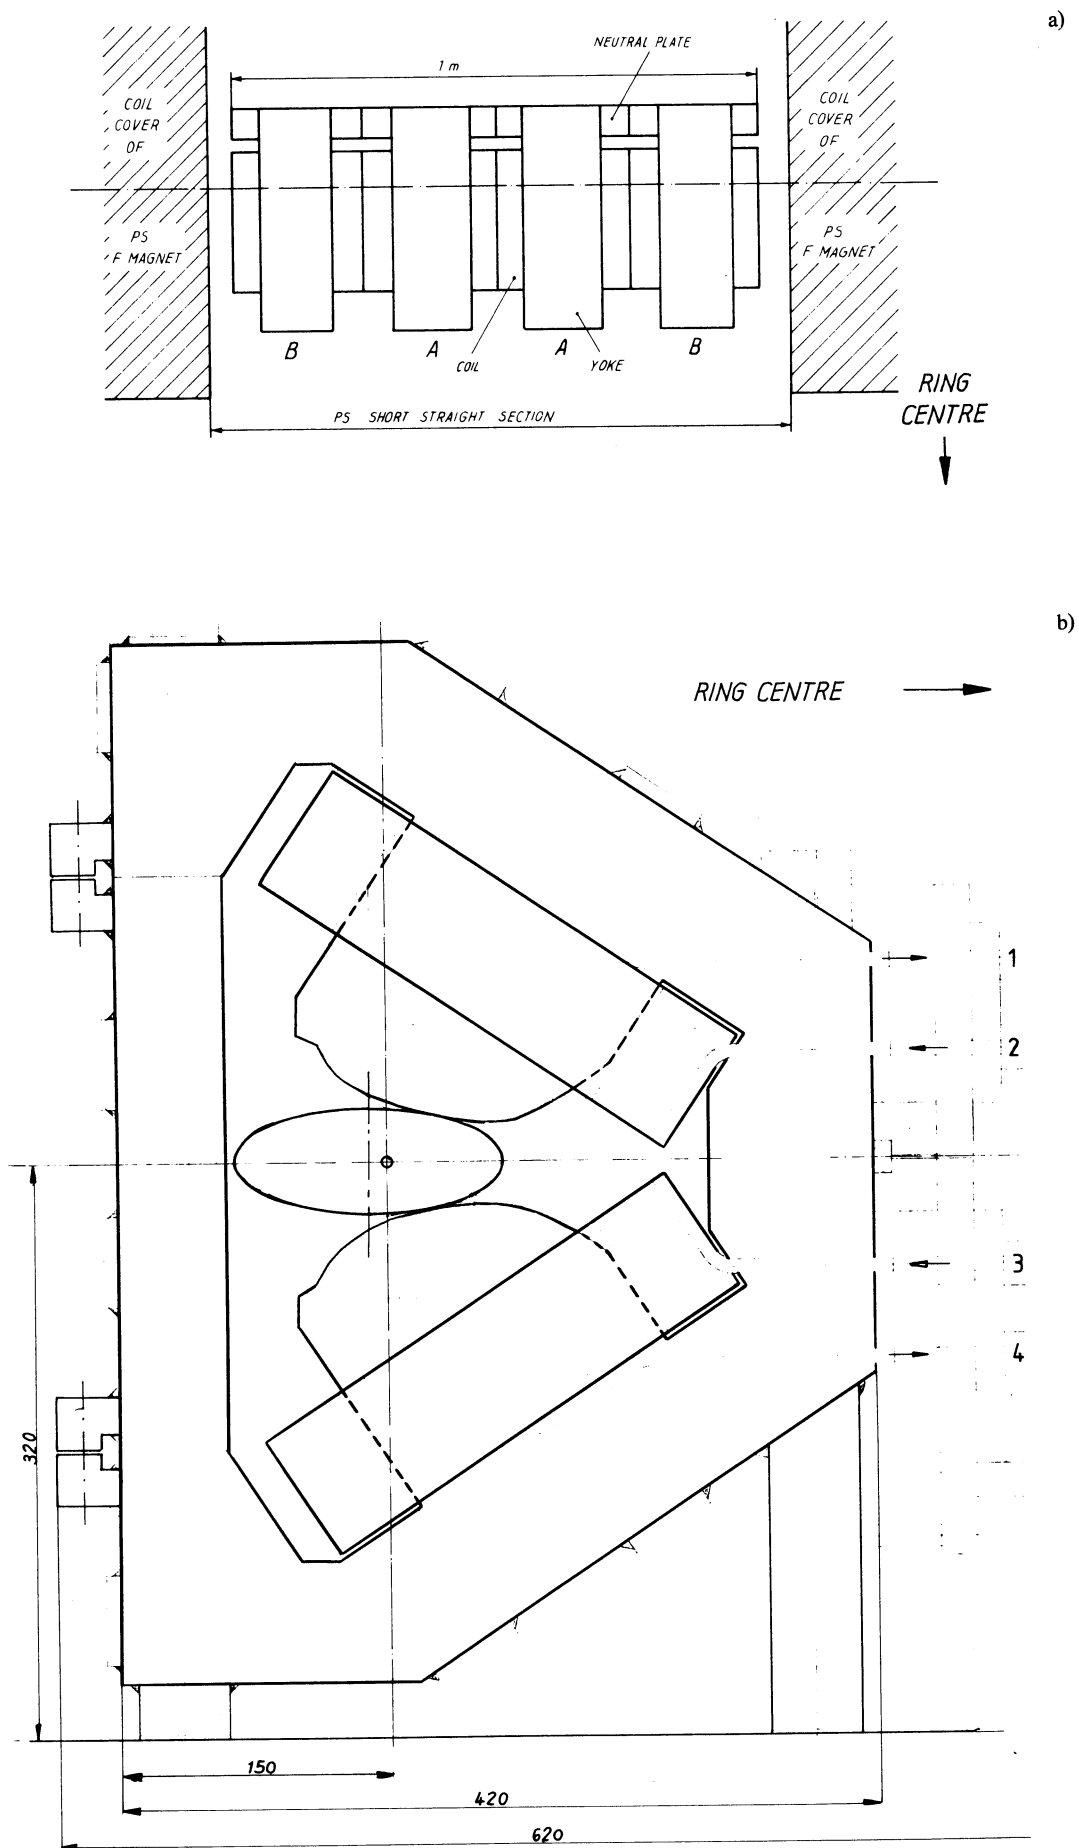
Robinson wiggler magnet in the PS: a) plane view of wiggler layout in short F straight section; b) side view of one wiggler block.
